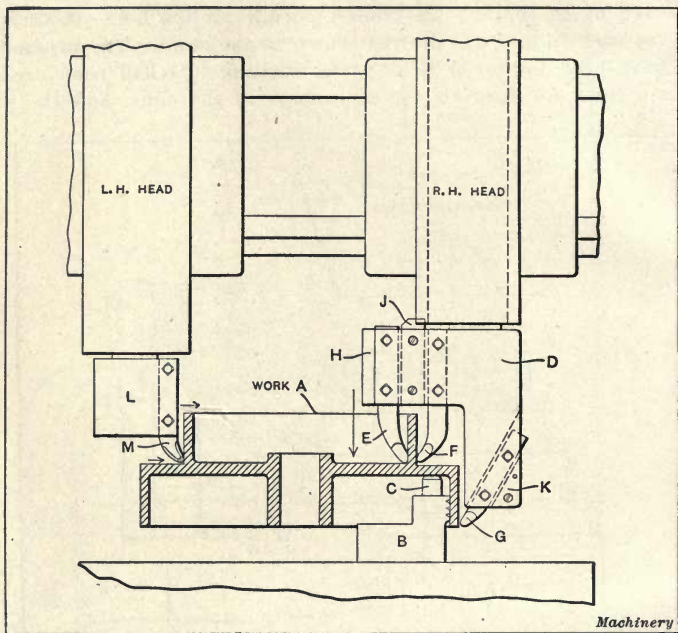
Application of Multiple Turning Tool to Vertical Boring Mill
